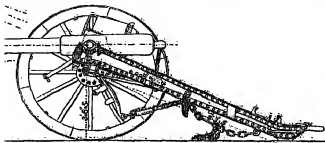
9-pounder Field Gun Carriage (elevation).
